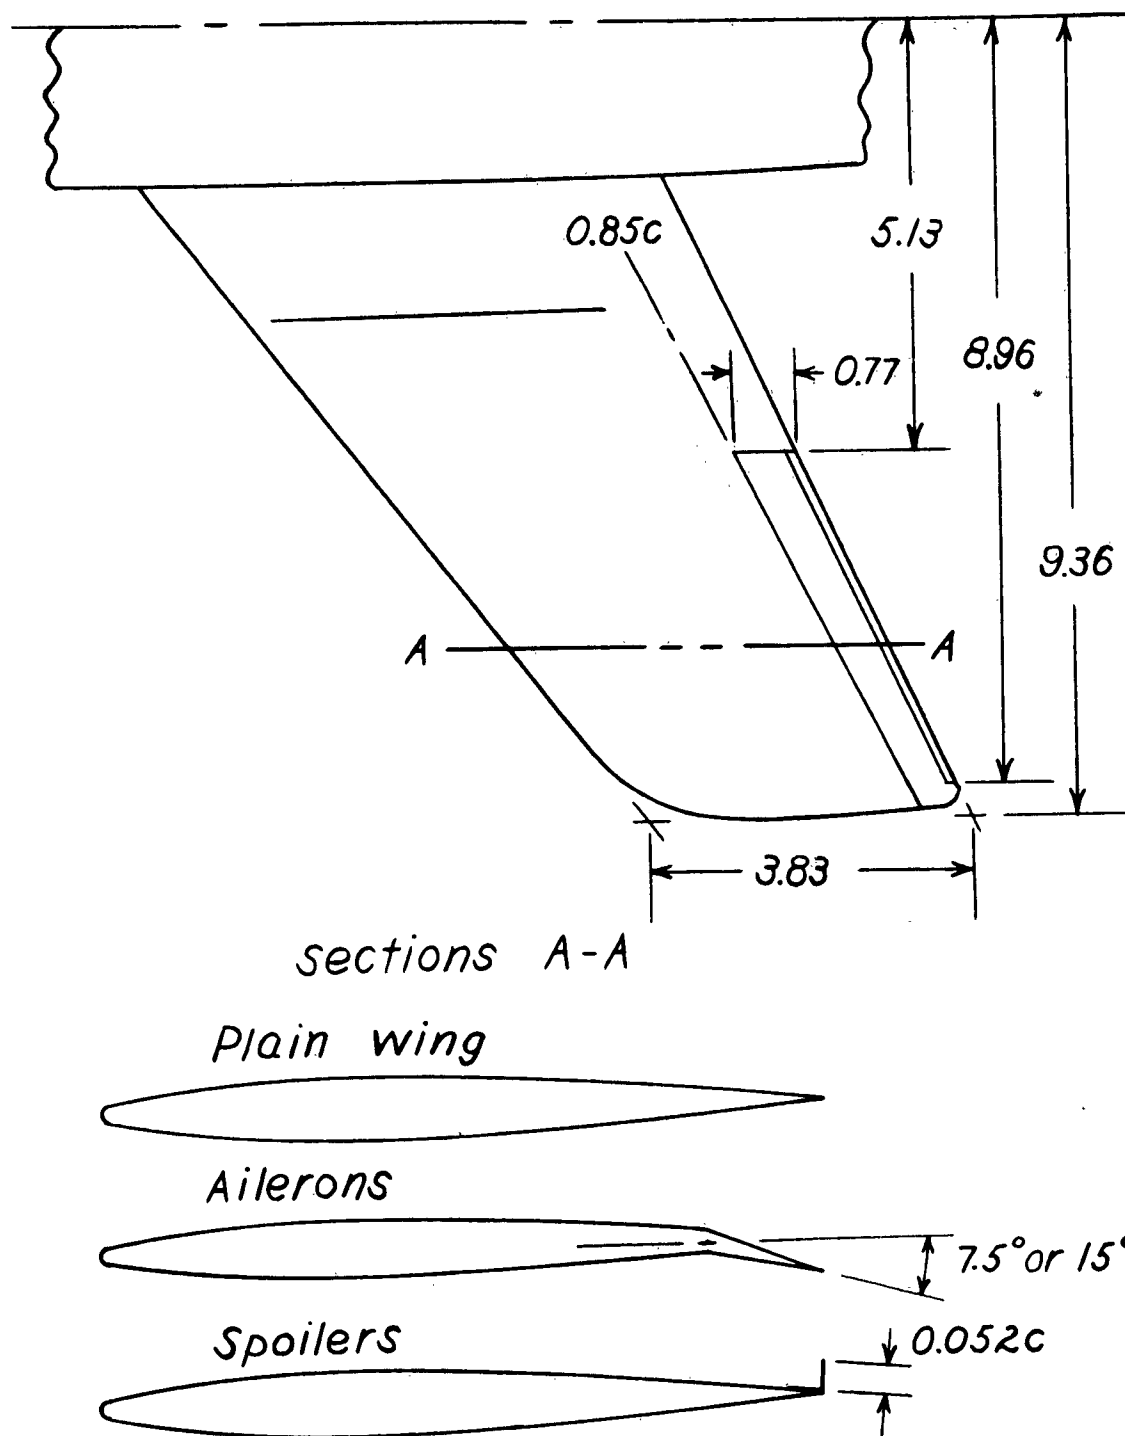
Aileron and spoiler details. All dimensions in inches.
